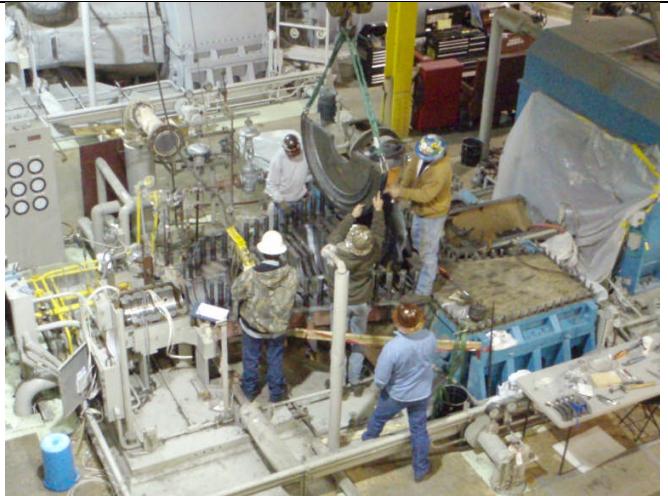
Turbine Generator No. 2 Major Overhaul – Contractors removing lower diaphragms for inspection
